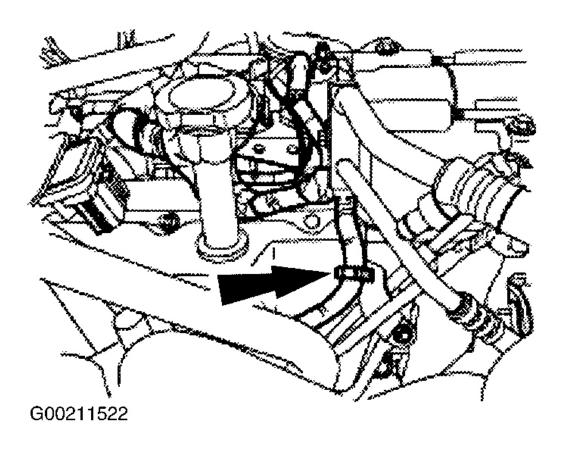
Removing & Installing Wiring Harness (Excursion & "F" Series) Courtesy of FORD MOTOR CO.
